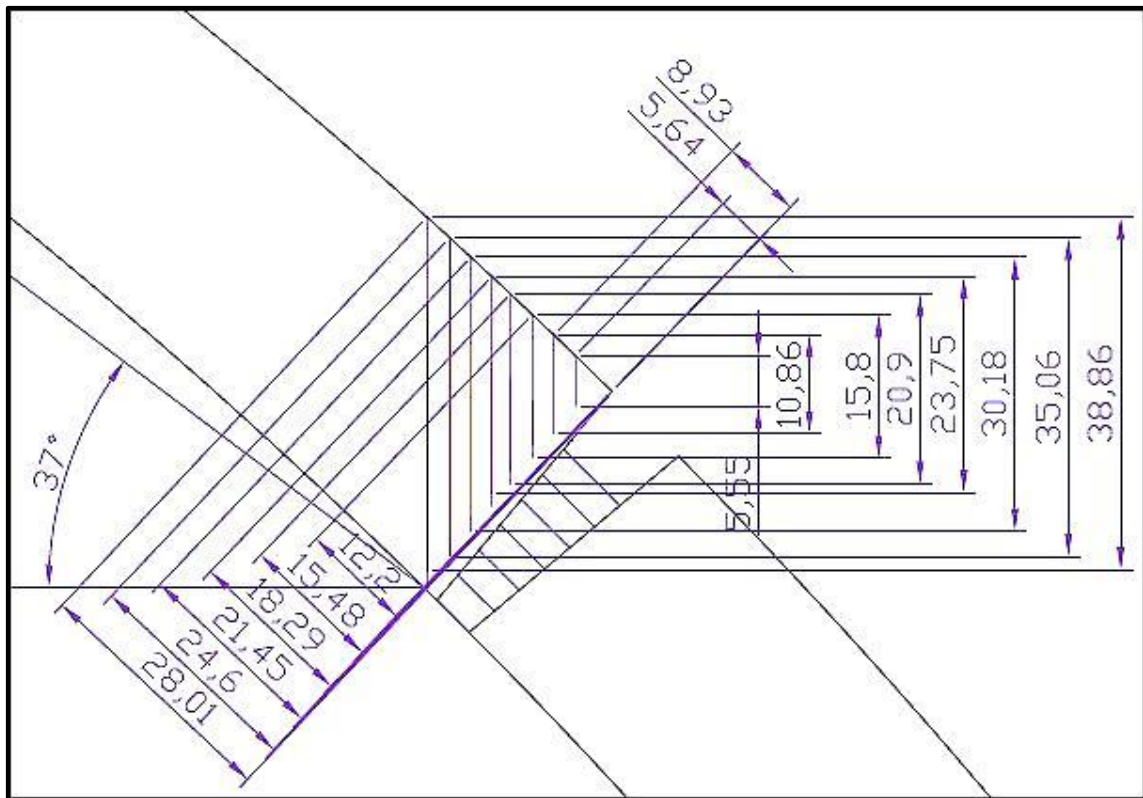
AutoCAD drawing of the tandem MIG welds thermocouple placement
